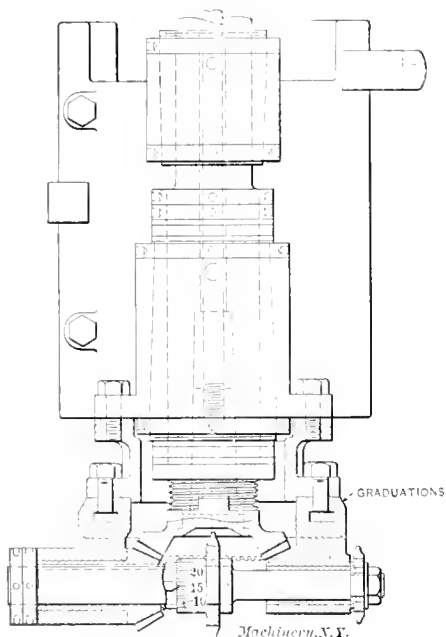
Design of Becker-Brainard Horizontal Milling Attachment for Vertical Millers.
